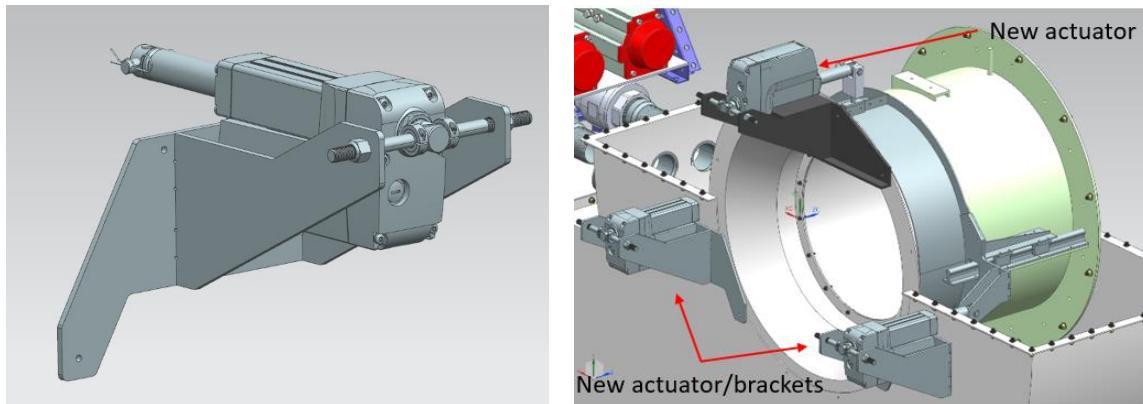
New actuator/bracket placement to provide more points of contact on sliding ring valve of throttle.
